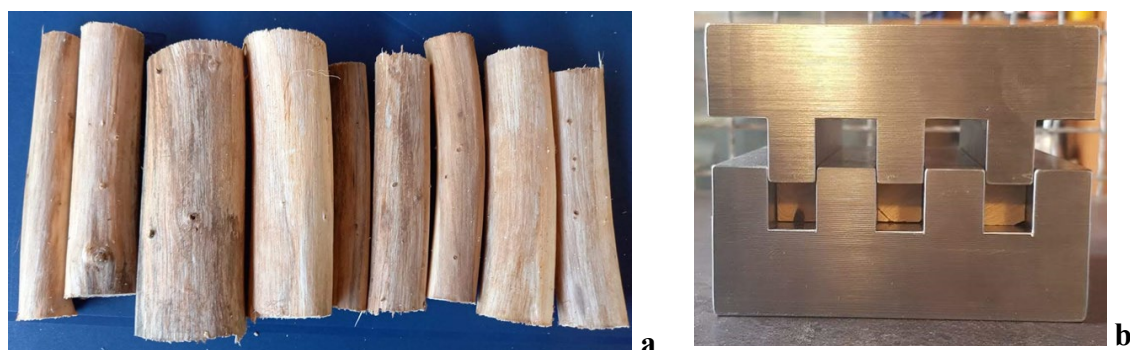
Sample preparation: a) debarked juniper logs; b) cut specimens in hot-pressing mold.
